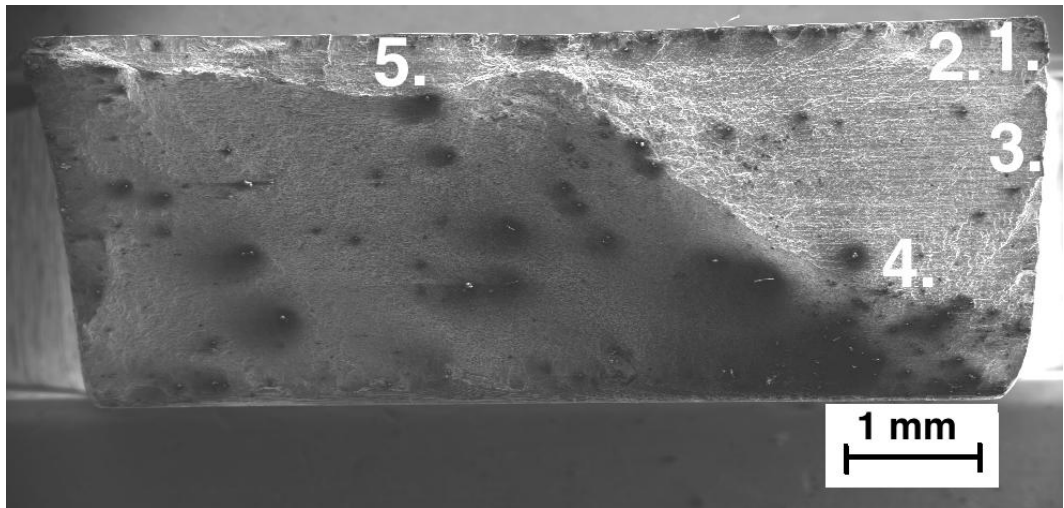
Overview of the fracture surface of base material AA6082.50-T6, the specimen with fewest cycles to fracture. The numbers represent the different areas investigated further below.
